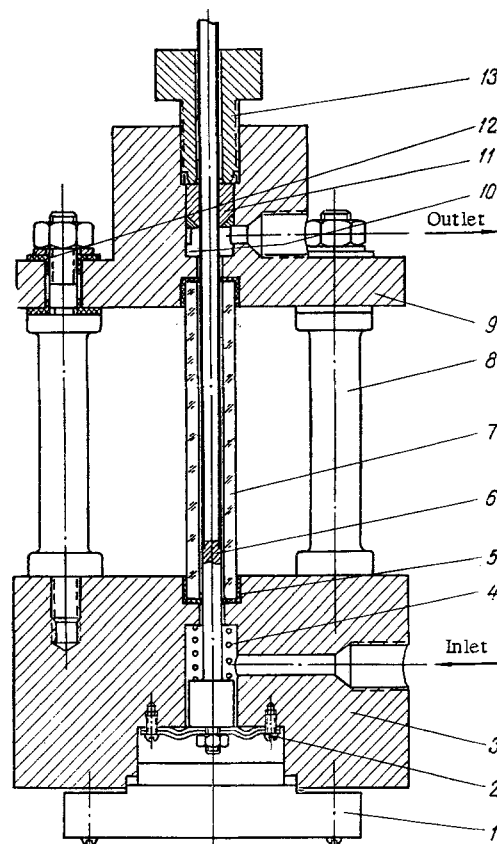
Working section of heat exchanger: 1) cover; 2) current lead; 3) base; 4) spring; 5) seal; 6) heated tube; 7) glass tube; 8) spacer rod; 9) top plate; 10) sealing section; 11) sealing gland; 12) insulating washer; 13) nut.
